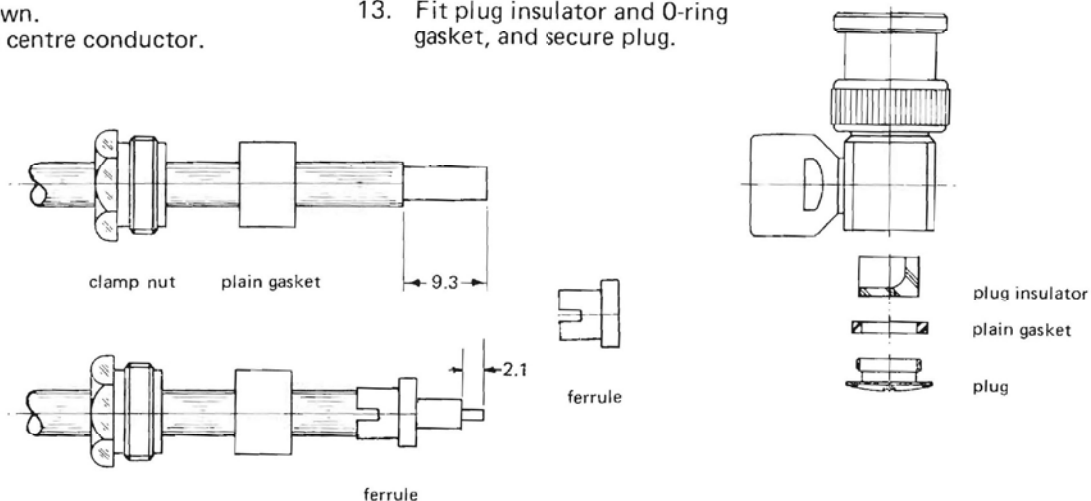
Plugs, captive contact, semi-rigid cable
